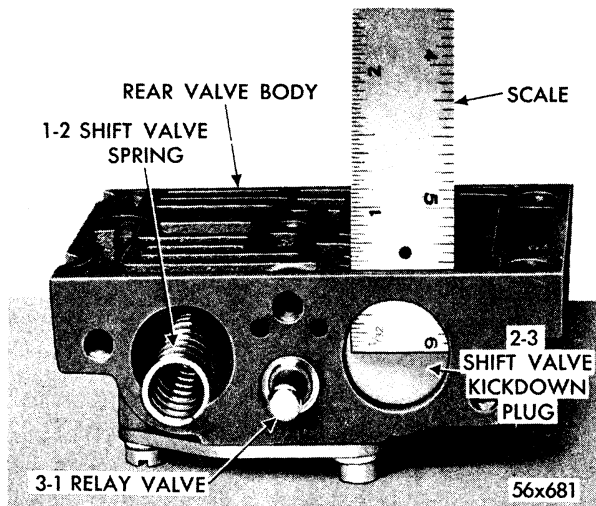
Using Scale to Hold 2-3 Shift Valve Kickdown Plug in Body During Assembly
